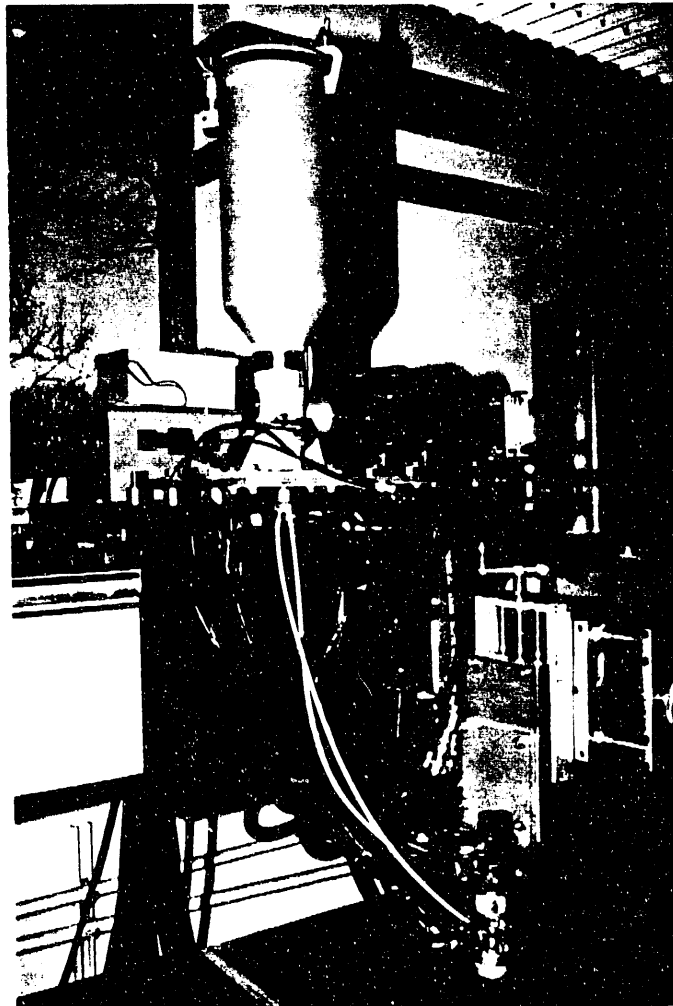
A photograph of the Plasma Arc Torch Assembly.
